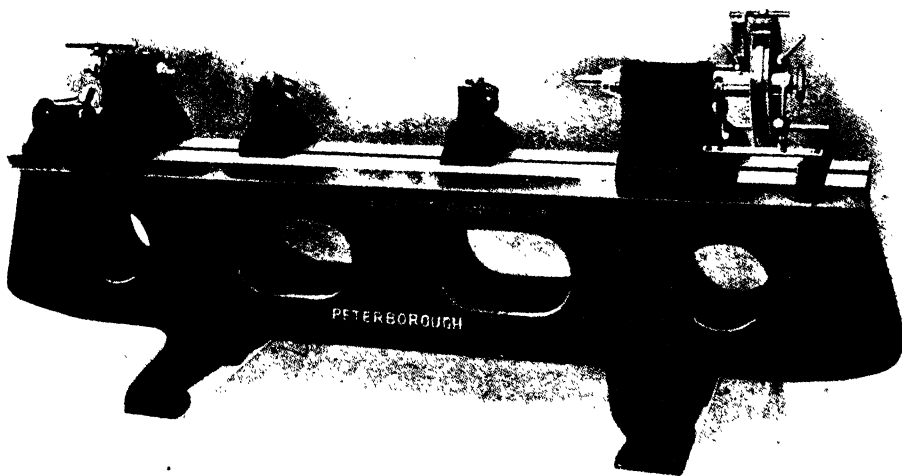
MEASURING MACHINE—CAPACITY 0-24 IN. OR 0-600 MM.
